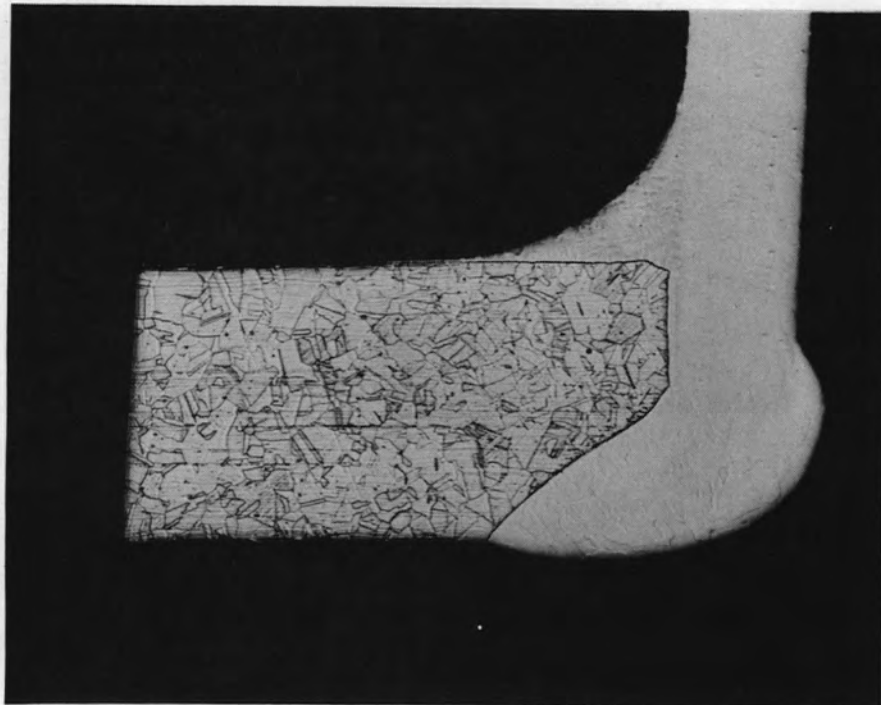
(Y-10984) Inconel Tube-to-Header Inert-Arc Weld Back Brazed with General Electric 62 Alloy. 50X. Unclassified.
